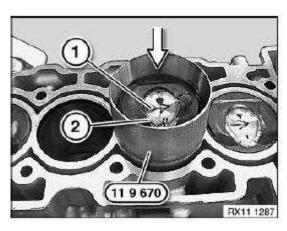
Pressing Piston With Special Tool (11 9 670) Courtesy of BMW OF NORTH AMERICA, INC.
